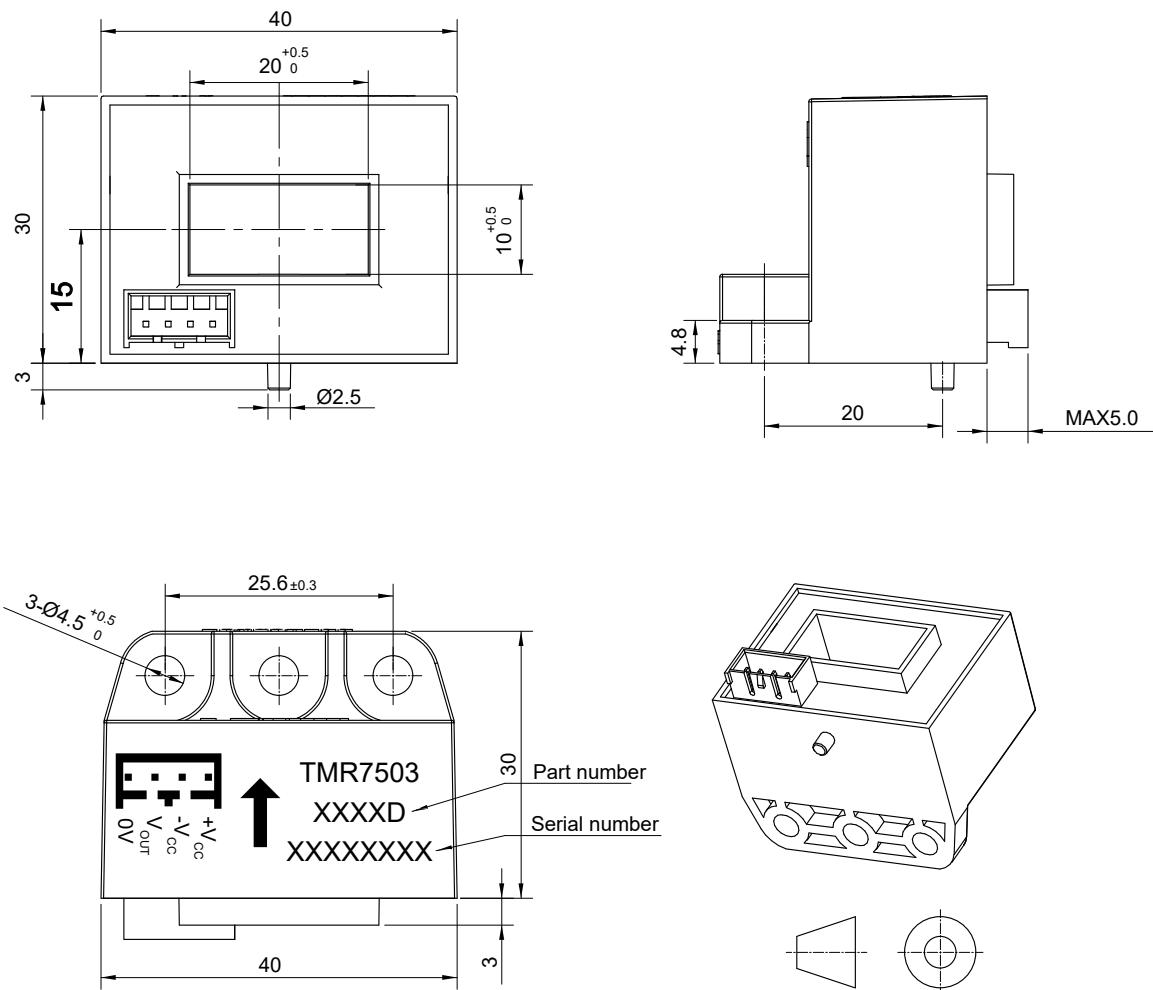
Sensor outline (unit: mm, tolerances for unmarked scales ± 1 mm)
